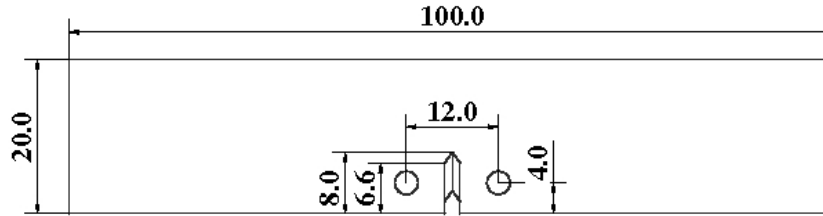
Schematic illustration of SE(B) test specimen (dimensions in mm).
